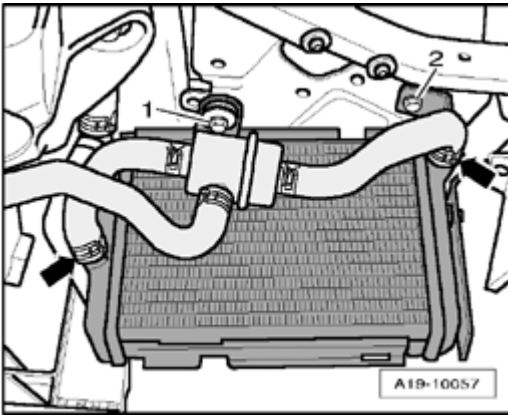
Auxiliary Radiator, Coolant Hoses & Bolts
